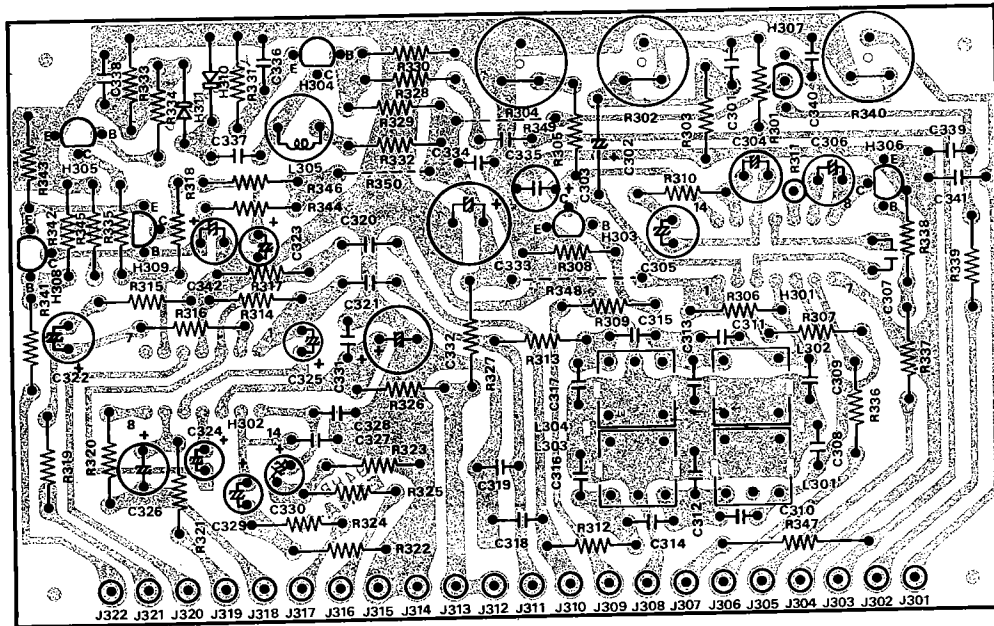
MPX Stereo Decoding Amplifier Assembly P300 Component Locations
